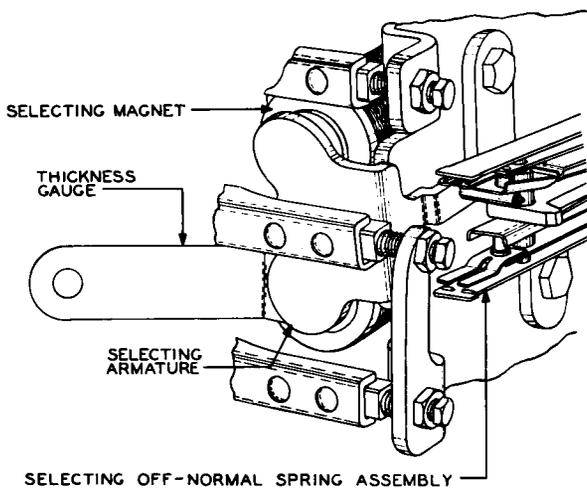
Fig. O — Method of Checking Front Contact Make on Selecting Off-Normal Spring Combination Fig. 104
